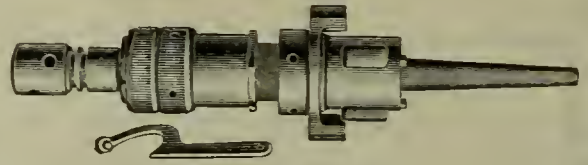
ATLAS TUBE EXPANDER; PLAIN TYPE. roller case in this type is driven by a bevel pinion on the taper pin and a shaft passing through a pipe support. Revolving the case instead of the pin, secures all the advantages of the Atlas expander in relation to speed, and makes this tool four times faster than the regular pin driven tools.
